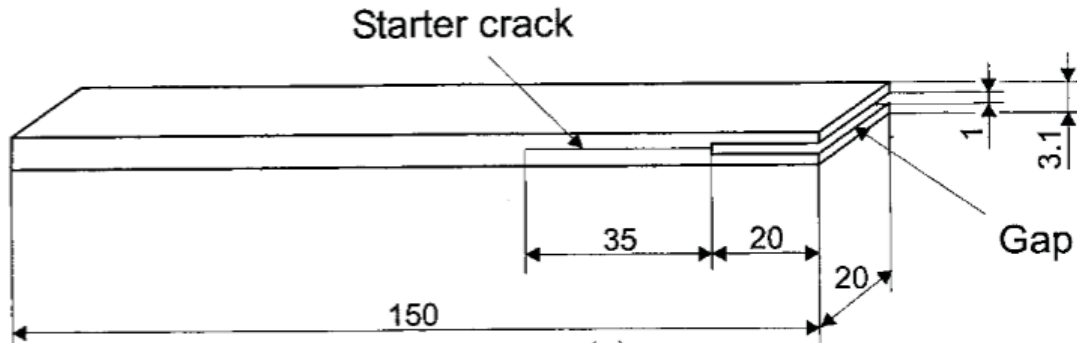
Geometrical features and dimensions of the CFRP specimen [10].
